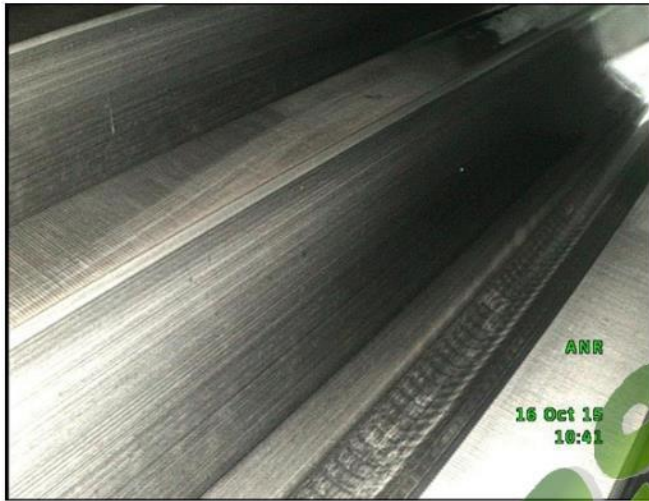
shows bearing position no. 10, the bearing of the high speed shaft at rotor side. The bearing shows no irregularities.
